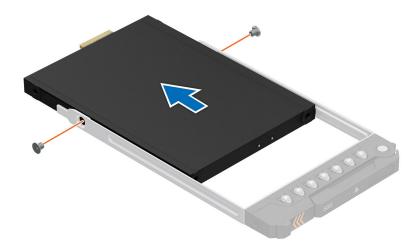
Removing the EDSFF E3.S drive from the drive carrier
